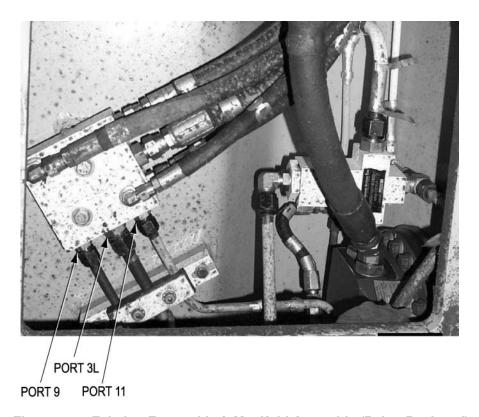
Existing Forward Left Manifold Assembly (Being Replaced)
